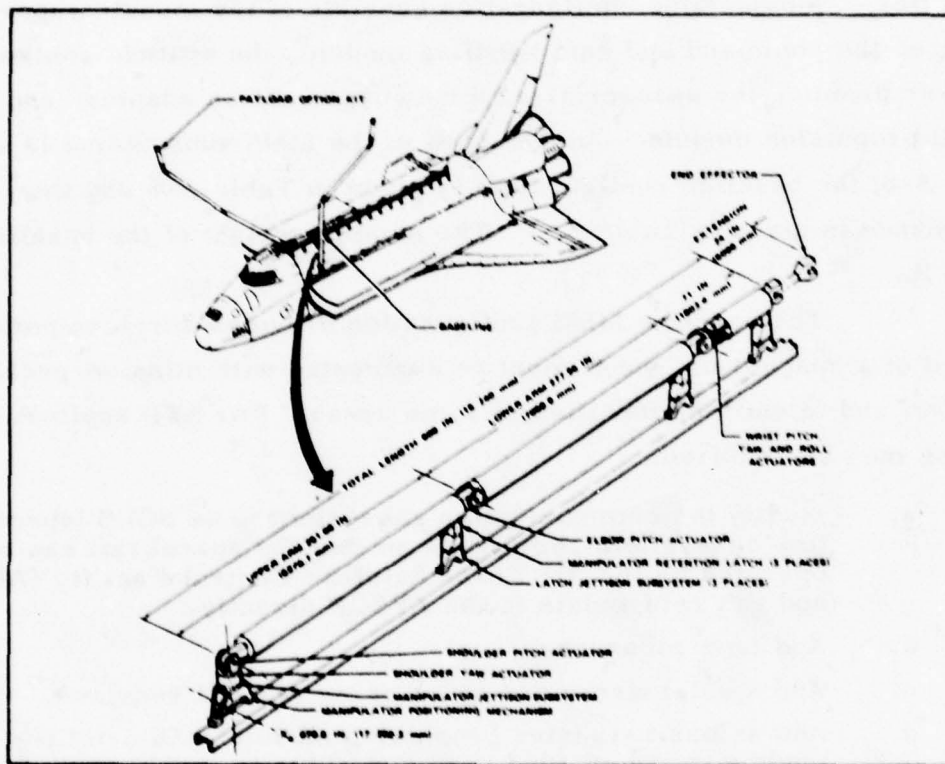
Manipulator Arm Assembly and Location on Orbiter
